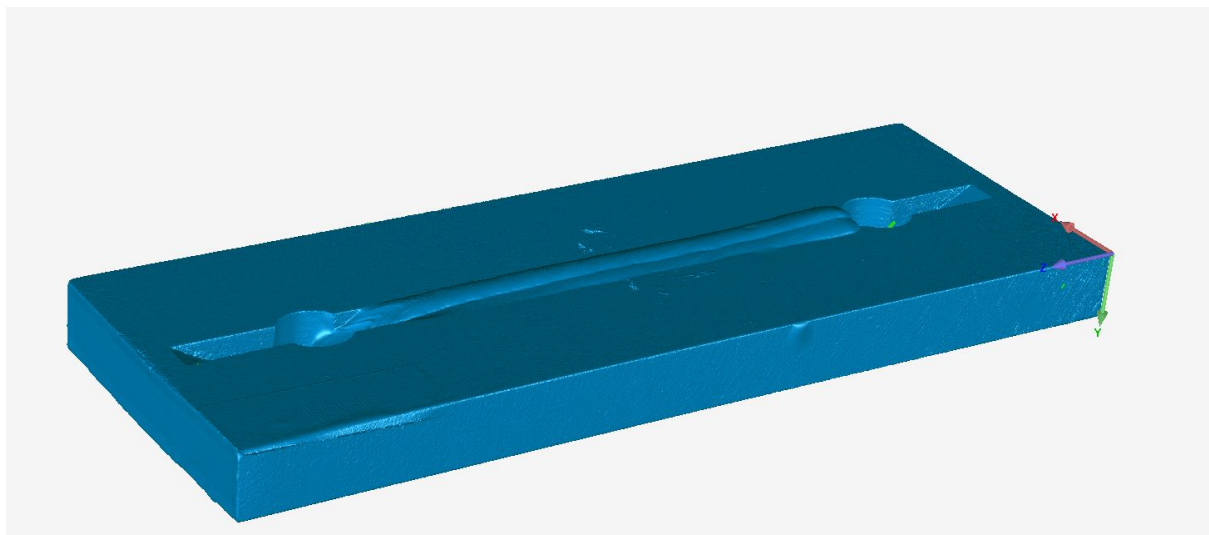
Three dimensional surface profile of the NG-SAW test piece as obtained by laser scanning after the completion of welding.
